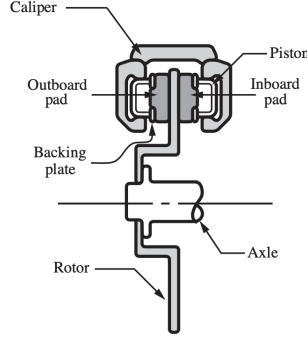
Cross-section of a simplified rotor brake system. The caliper houses the hydraulic pistons that actuate the brake pads, and wheel (not shown) is attached to the rotor
